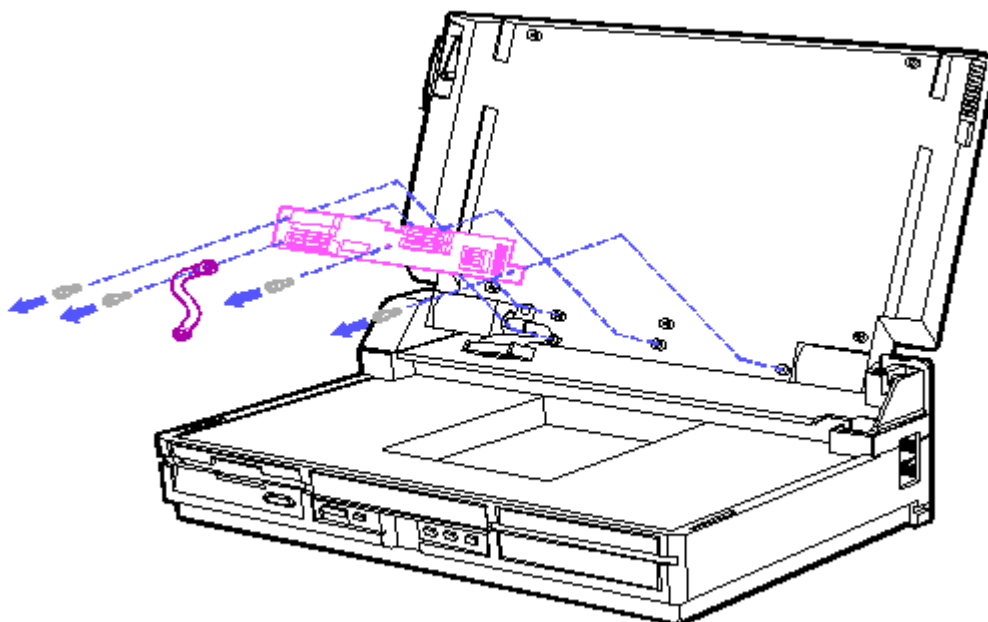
Removing the Display Backlight Inverter Board and Ground Cable
